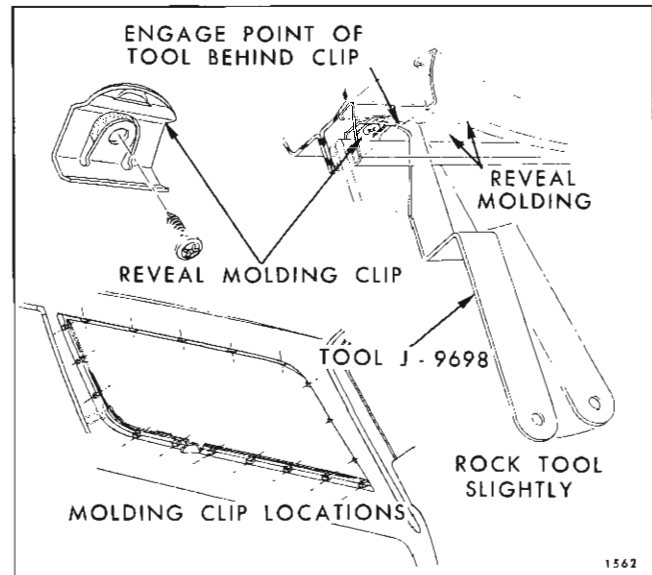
E36—Rear Quarter Window Reveal Molding Removal
